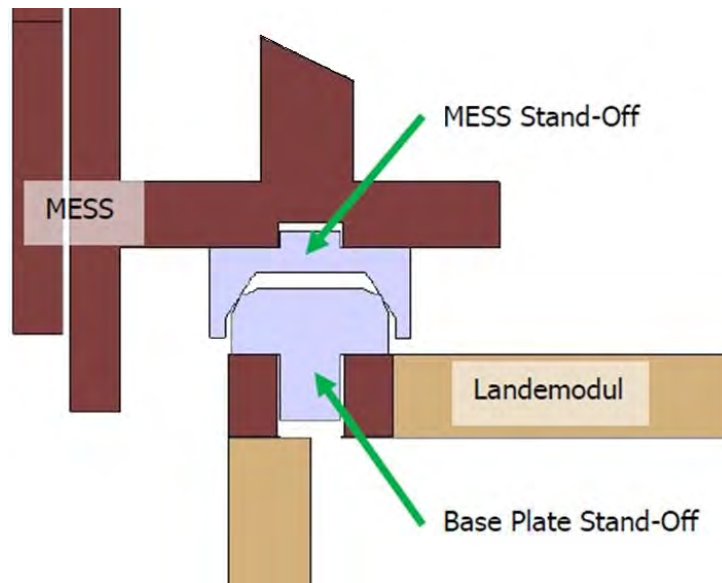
Detailed sectional view of the stand-offs and the bearing corners
